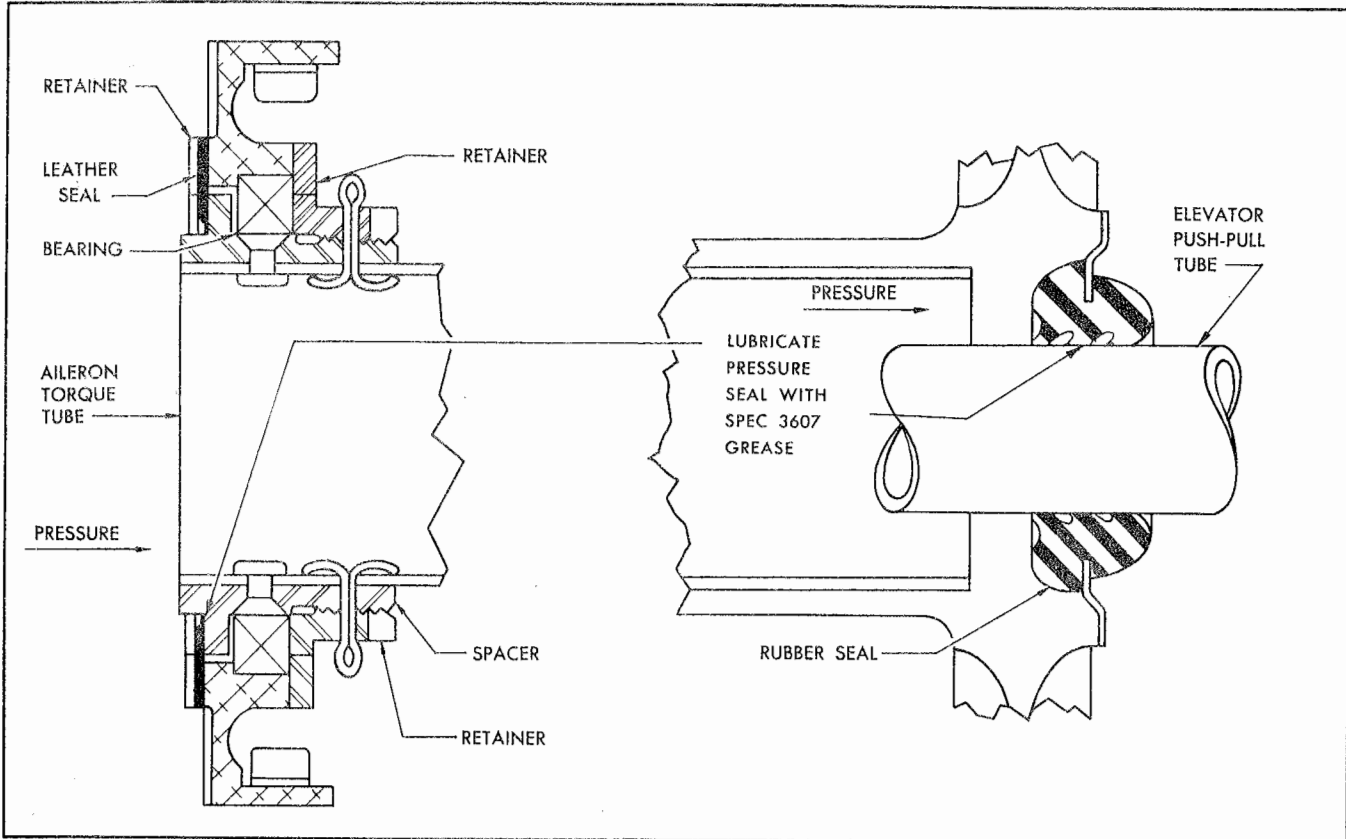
Cockpit Sealing — Aileron Torque Tube Seal
